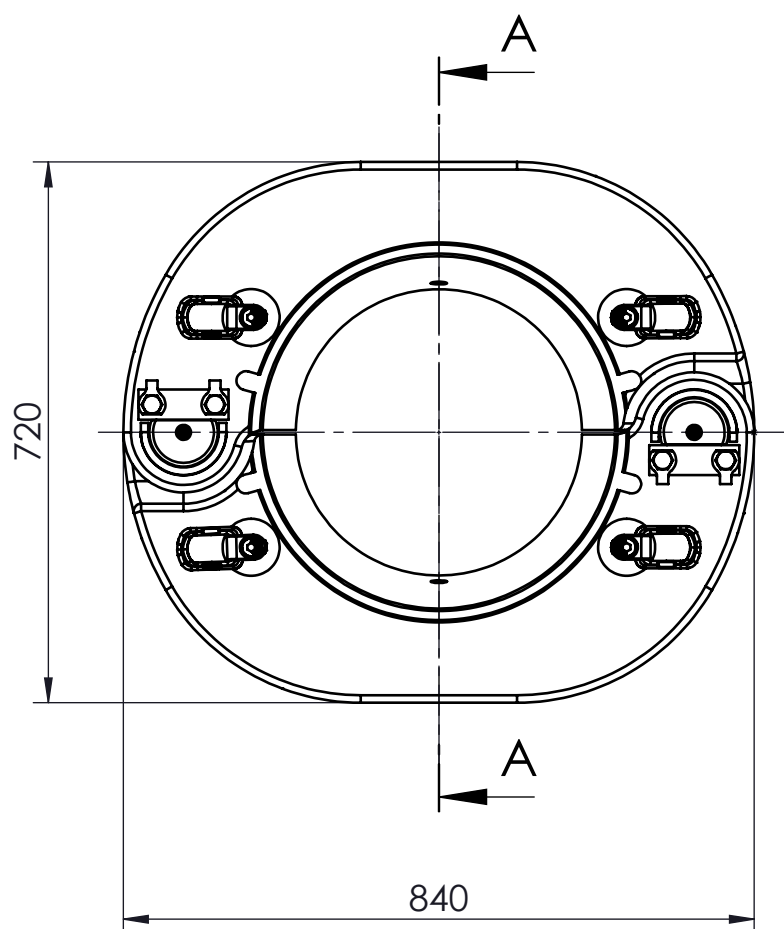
Principle drawing of a HCS 200-13.3/8" - 11.3/4" main dimensions
